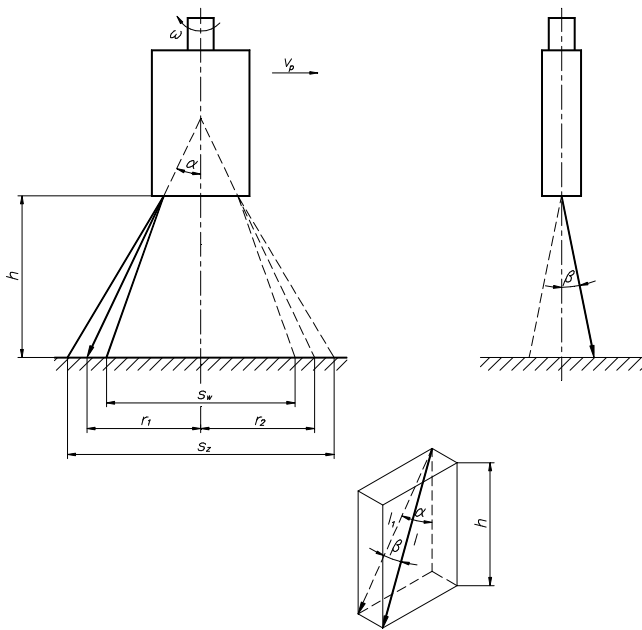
Diagram of geometric dependences that occur when cleaning flat surfaces with a rotary head
